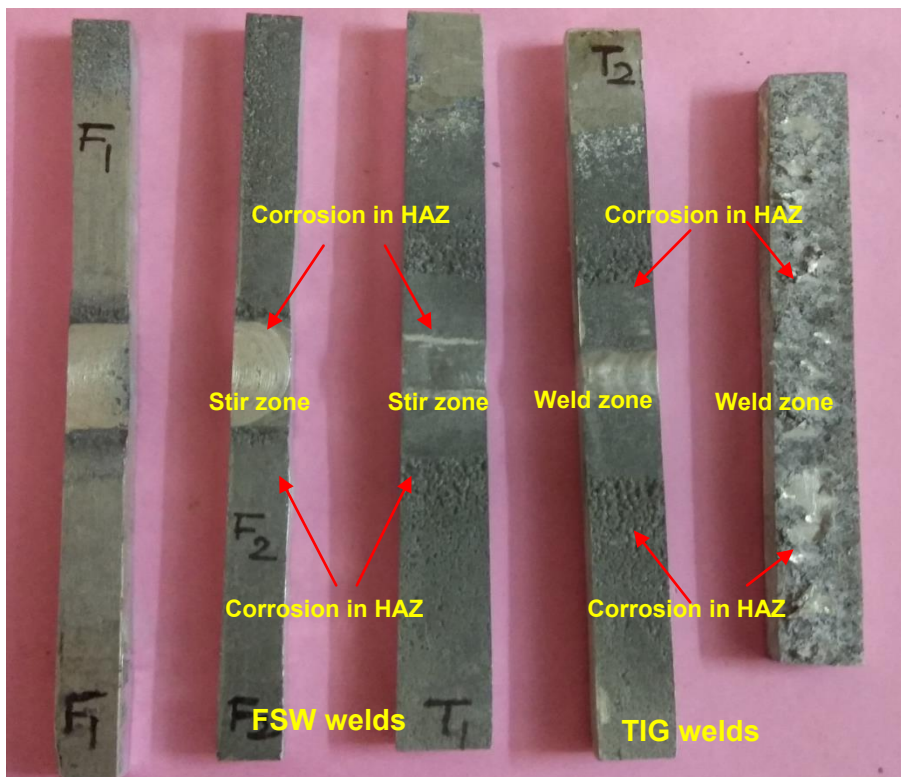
Samples after corrosion Corrected labeling in the image. Eg: FSW welds, TIG welds, Base metal etc.
